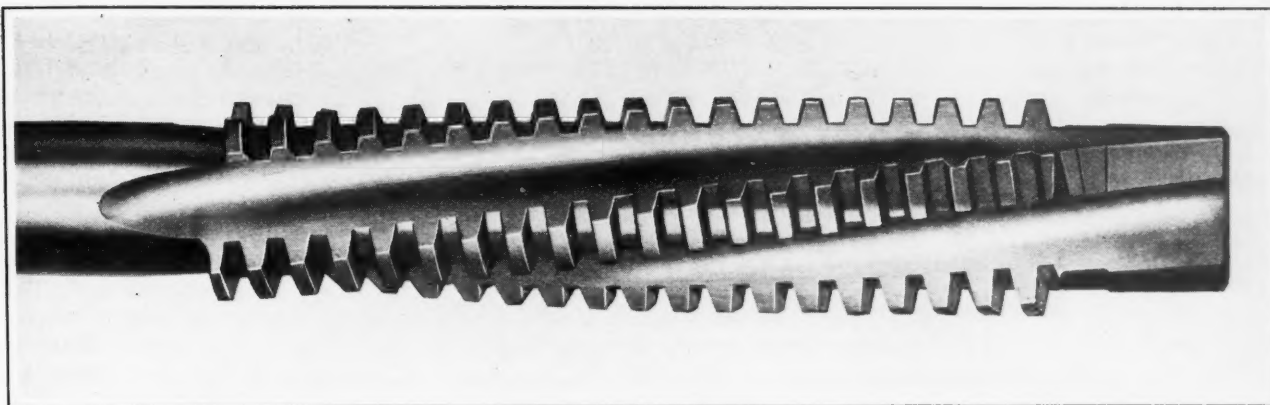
Acme Double-thread Finishing Tap having Relief, Spiral Flutes, and Taper in the First Threads
